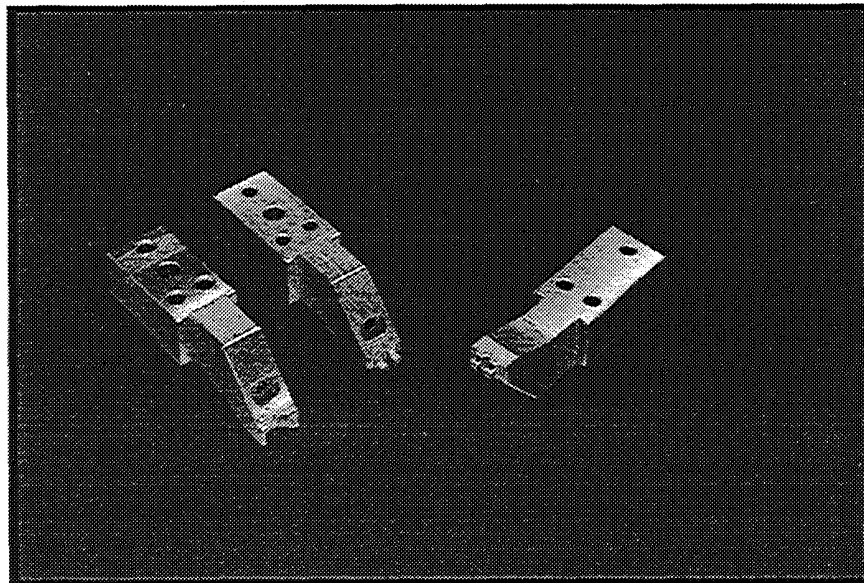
geometrically adapted vacuum gripper for the microassembly process
